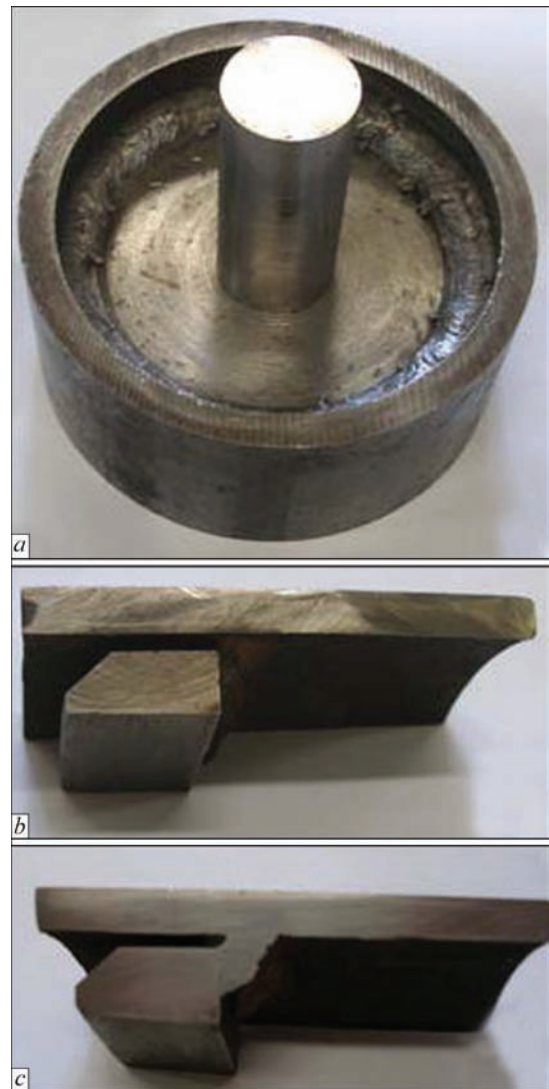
Results of welding-in the bottom to the pipe inner surface: a — circumferential weld with overlapping; b — real gap between bottom and pipe; c — shape of welded joint
